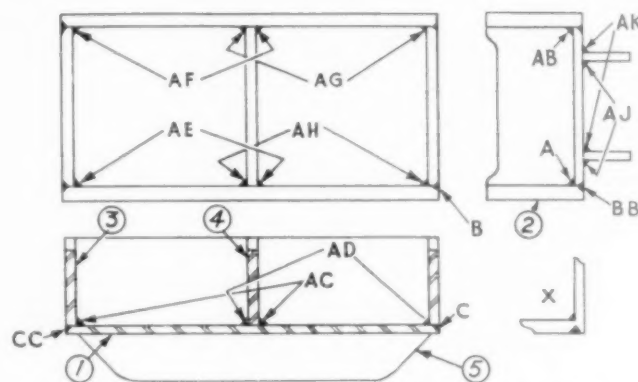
The weldment, reproduced from Installment No. 1, this series.
